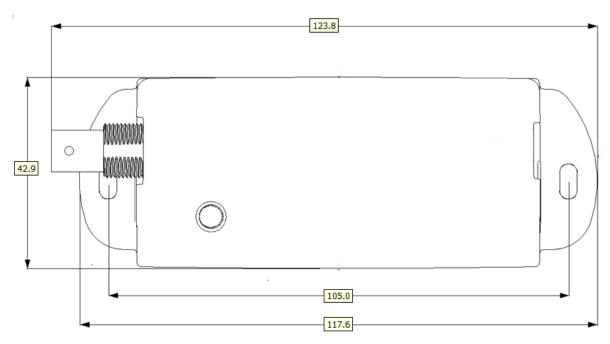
Modbus EC Sensor Adapter Dimension - Top View
